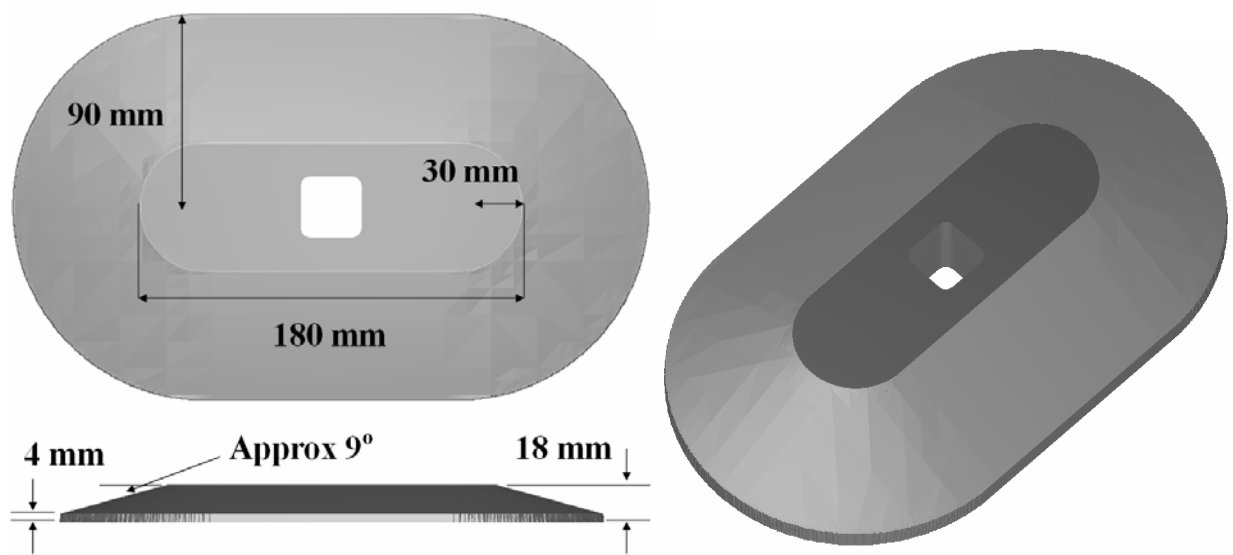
Top and Isometric View of a CAD drawing of the SITBAR
